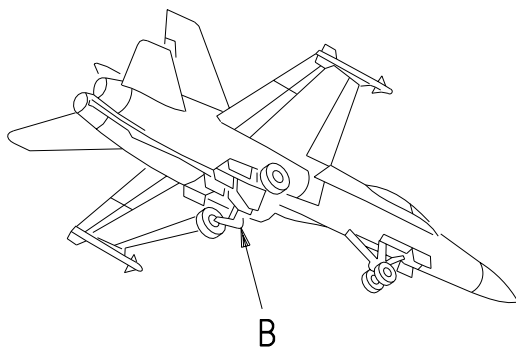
MLG Lever Axle Corrosion Inspection Areas (Sheet 2)
